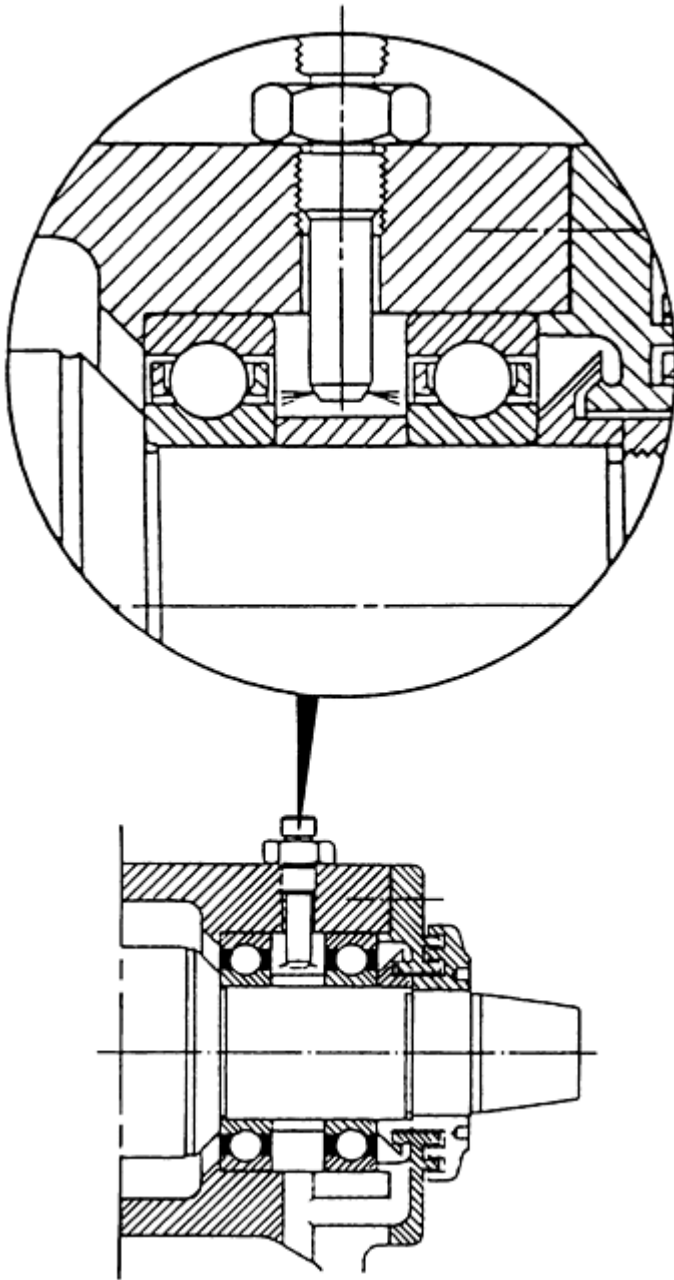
Oil jet lubrication suitable for high speeds of rotation. Oil is injected into the bearing under pressure to gain access to the bearing interior to remove heat. Oil jet velocity must be high enough to piece air vortex caused by bearing rotation.
